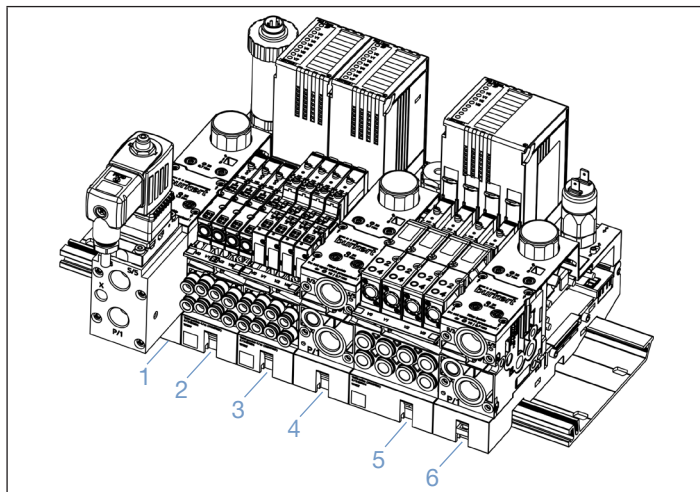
Assembly of a complete valve block AirLINE Ex, REV.2 (example)
